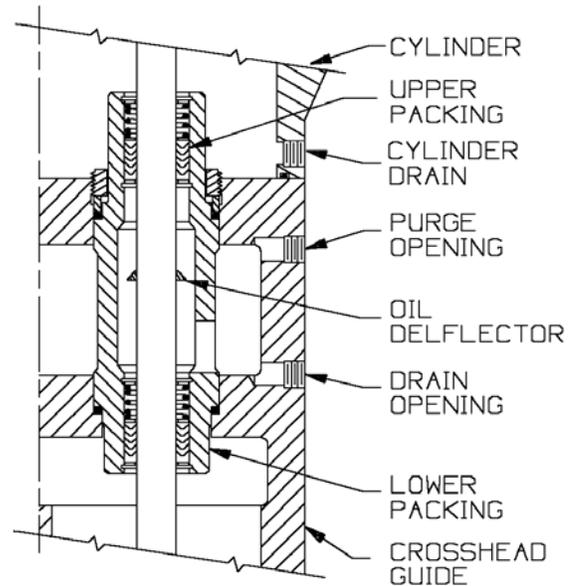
TYPICAL SEAL AREA CONSTRUCTION
